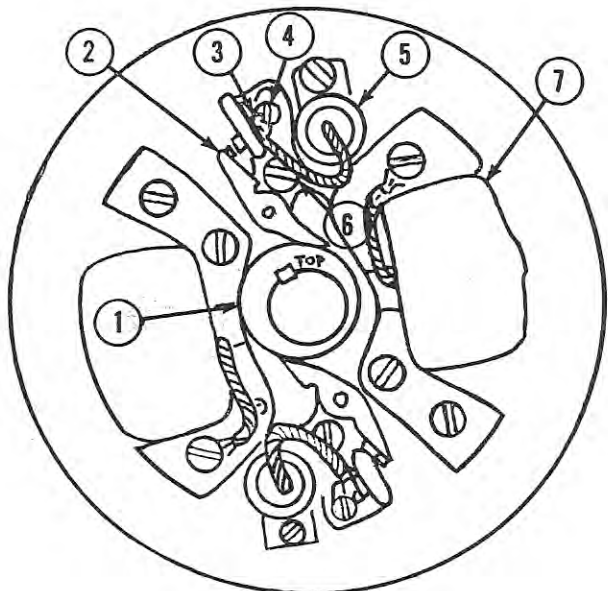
Magneto assembly with flywheel removed. Unit contains a separate coil, points and condenser for each cylinder.
